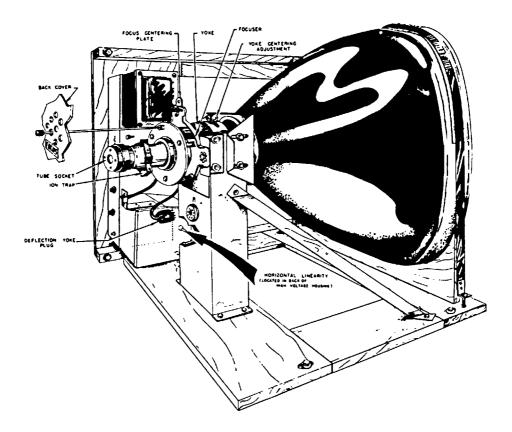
Typical focus adjustment assembly on neck of picture tube.
